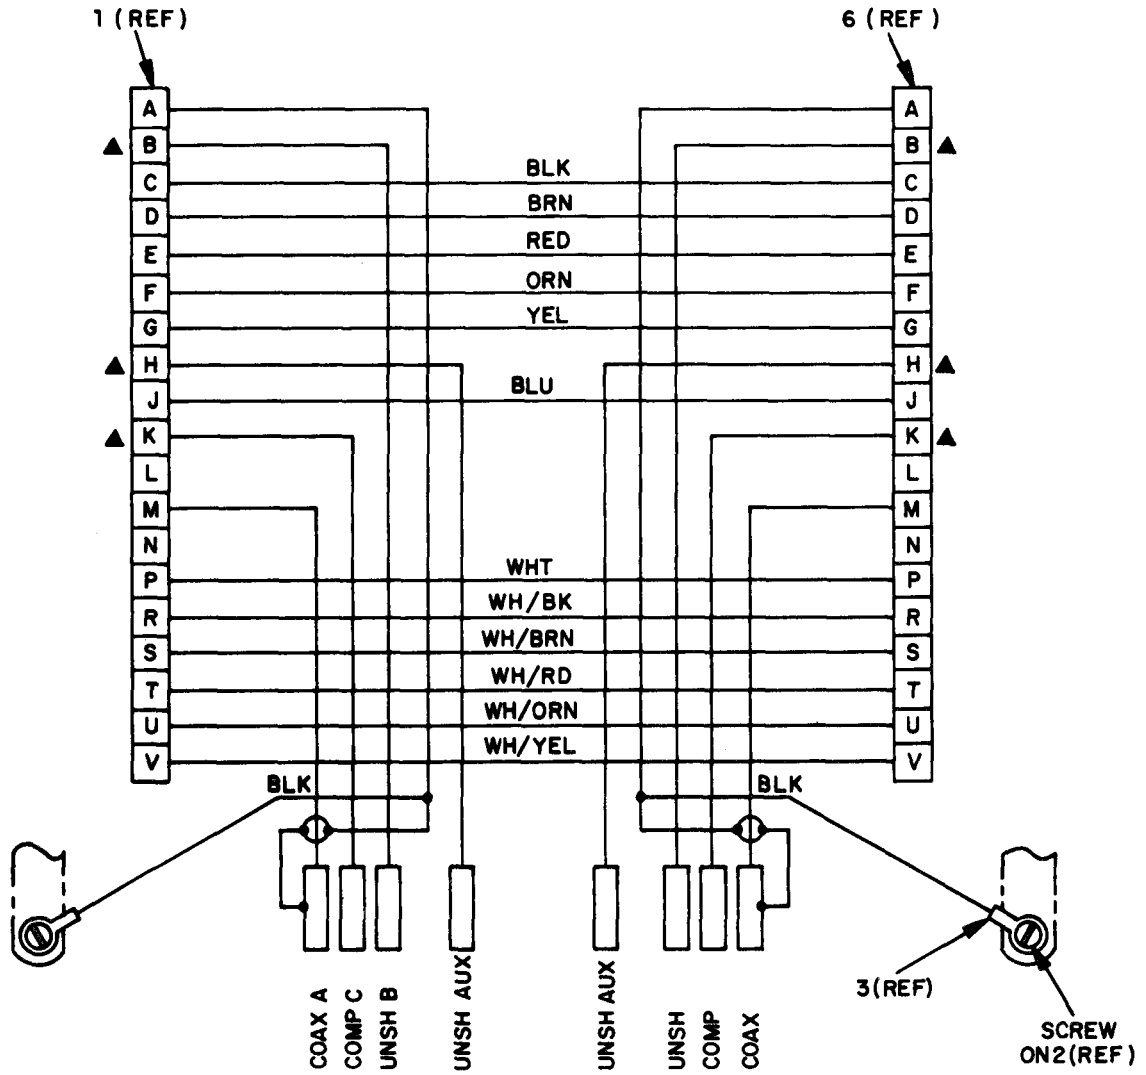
Main adapter cable assembly W4, part number 467-103-001 (sheet 2 of 2)
